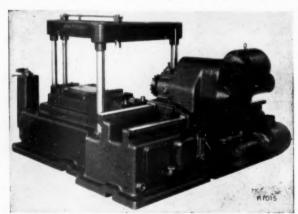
Rigidmil, showing Traveling Head, Hydraulic Drive, and Fixture.
